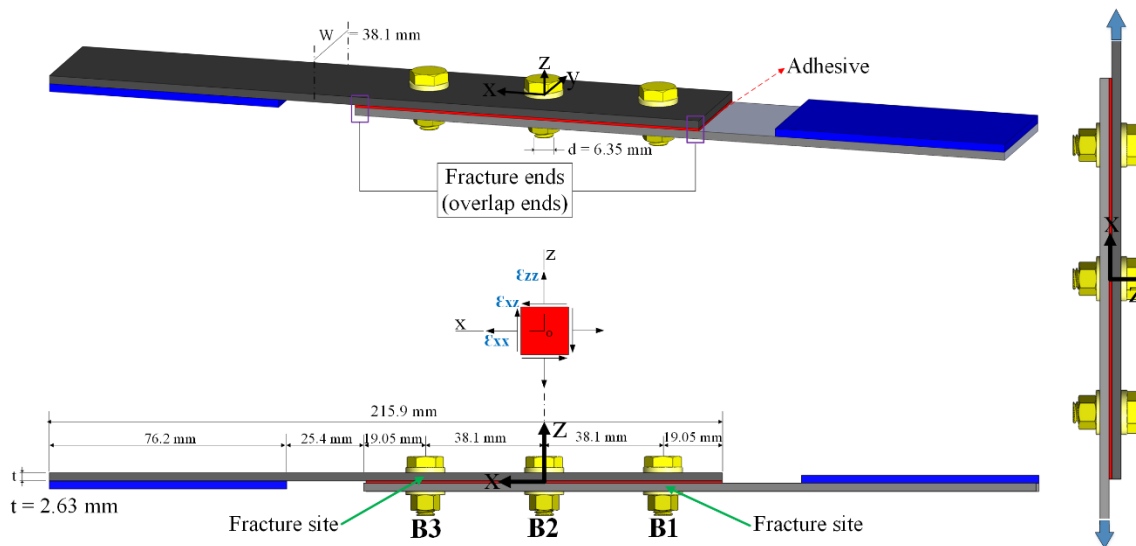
Specimen geometry/dimensions, identification of the three bolts, fracture ends (overlap ends) and fracture sites in the joint as well as strain components within the adhesive layer.
